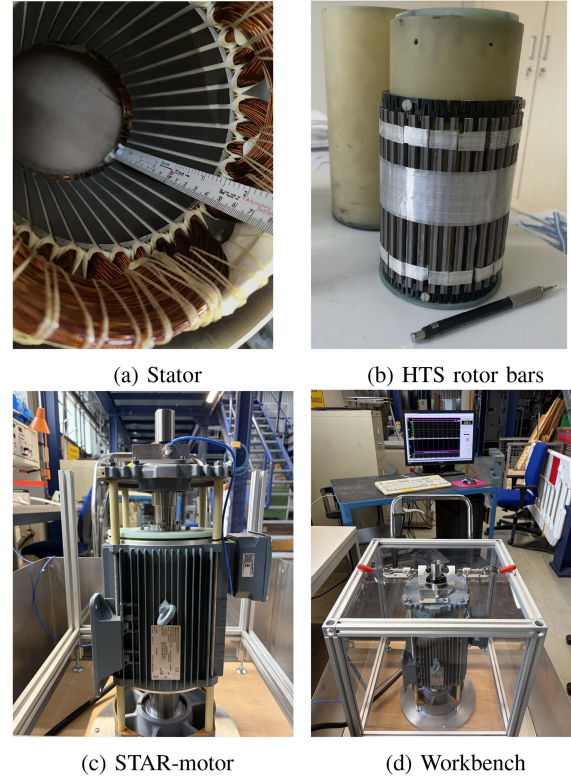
View into the stator (a), the inner rotor body with the bars attached (silver bandage to be removed after impregnation) (b), the assembled STAR-machine (c) and the completed test stand (d). (a) Stator. (b) HTS rotor bars. (c) STAR-motor. (d) Workbench.
